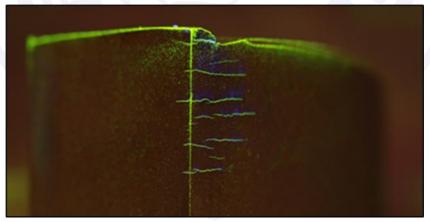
Cracks revealed in the inspection by magnetic particles.
